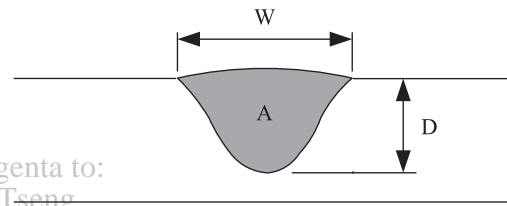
Schematic representation of weld geometry: D: penetration depth; W: bead width; A: weld cross-sectional area.
